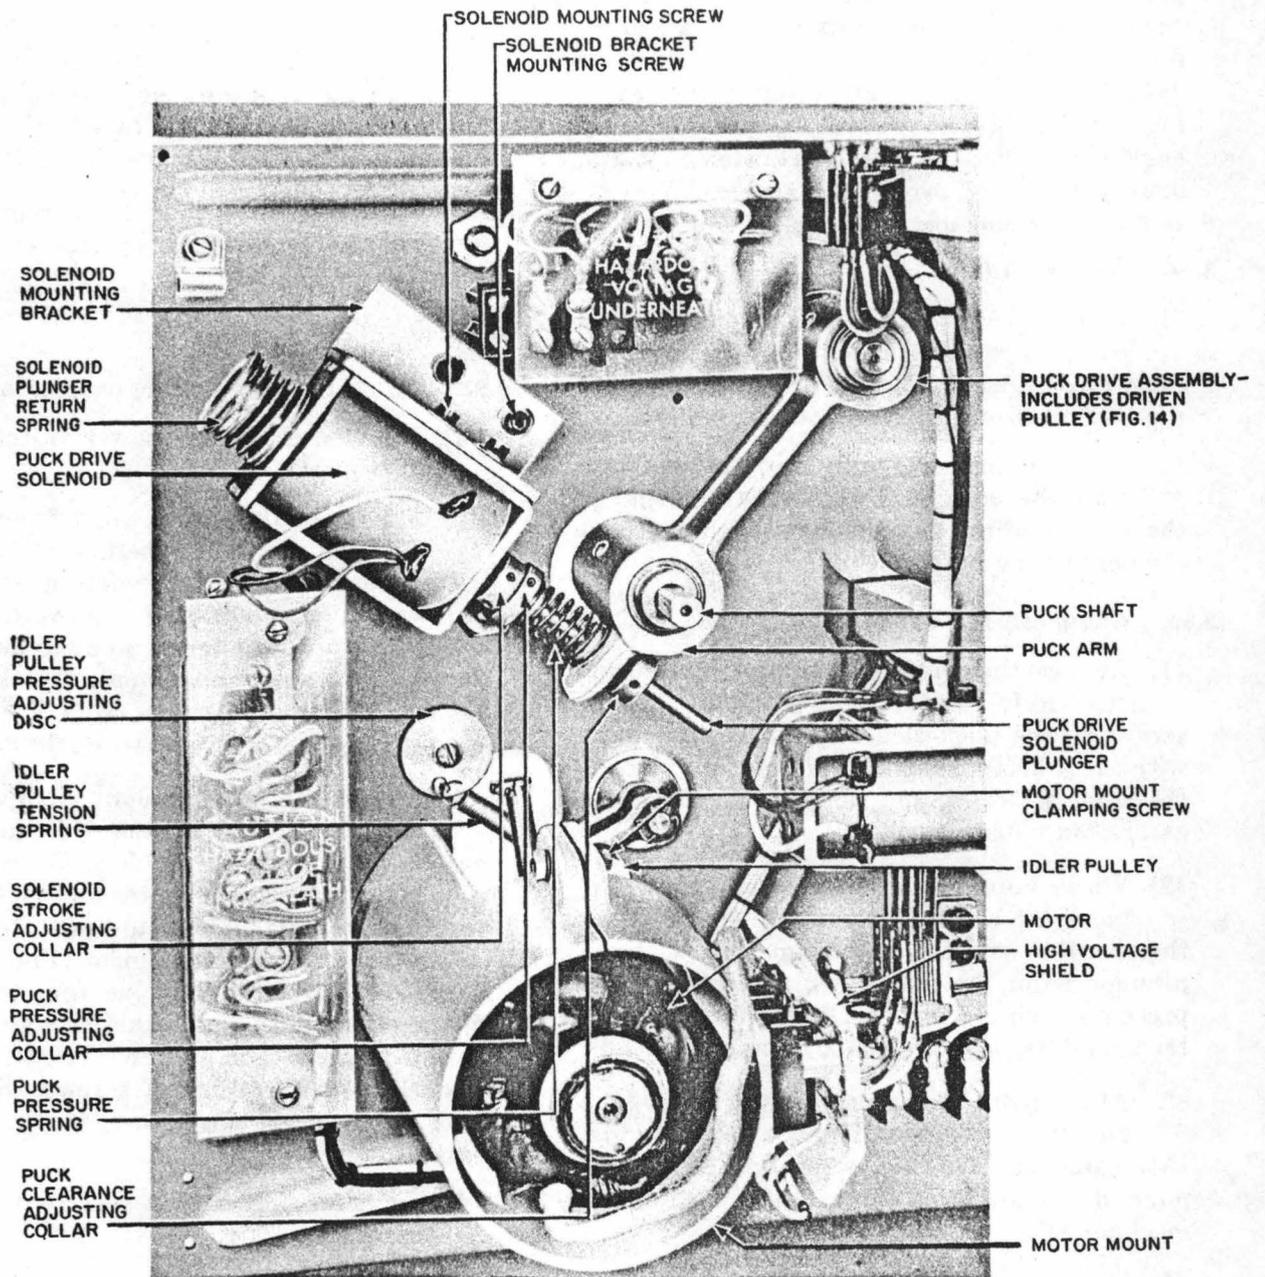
Puck Drive and Motor (Driven Pulley and Belt Removed)
